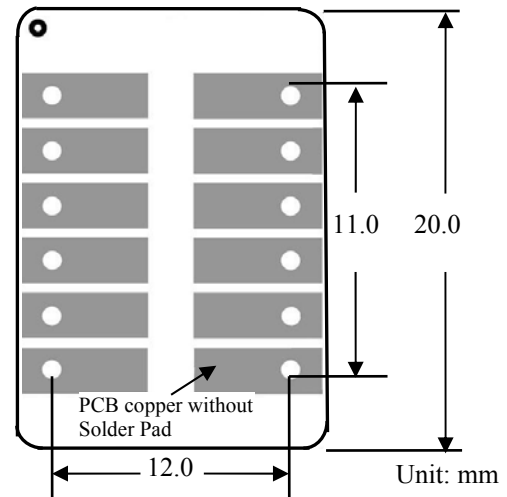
Top View of the Bottom Side of the Recommended PCB Foot-print
